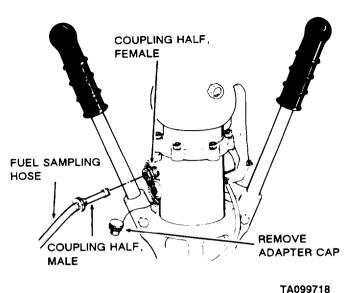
Attaching Fuel Sampling Hose to Nozzle (M970 and M970A1).
